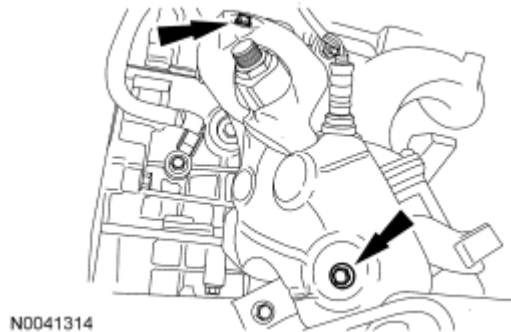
Locating Catalytic Converter-To-Engine Block Bracket And Bolts
